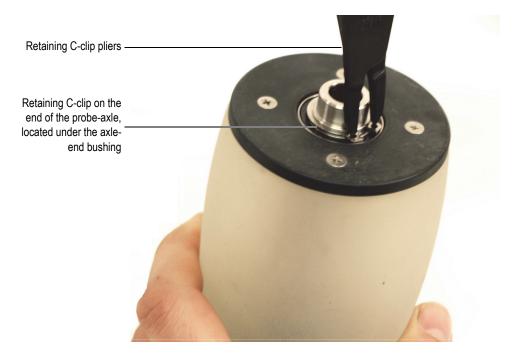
Removing the external retaining C-clip from the end of the probe-axle
